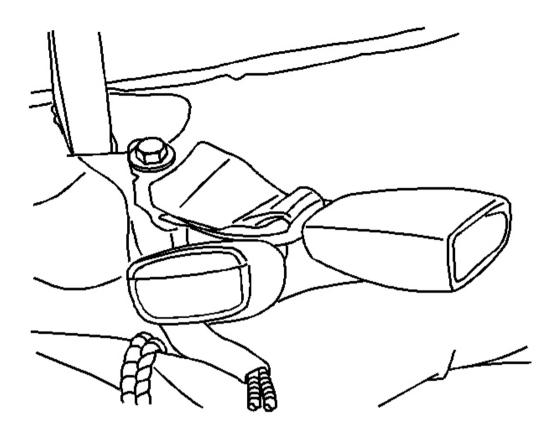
Seat Belt Buckle & Seat Frame Courtesy of GENERAL MOTORS CORP.
